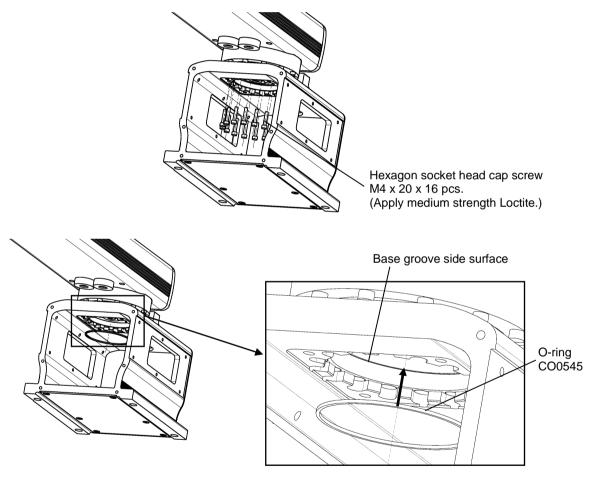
Mounting arm 1 and O-ring (KHL-500, KHL-600, KHL-700)
